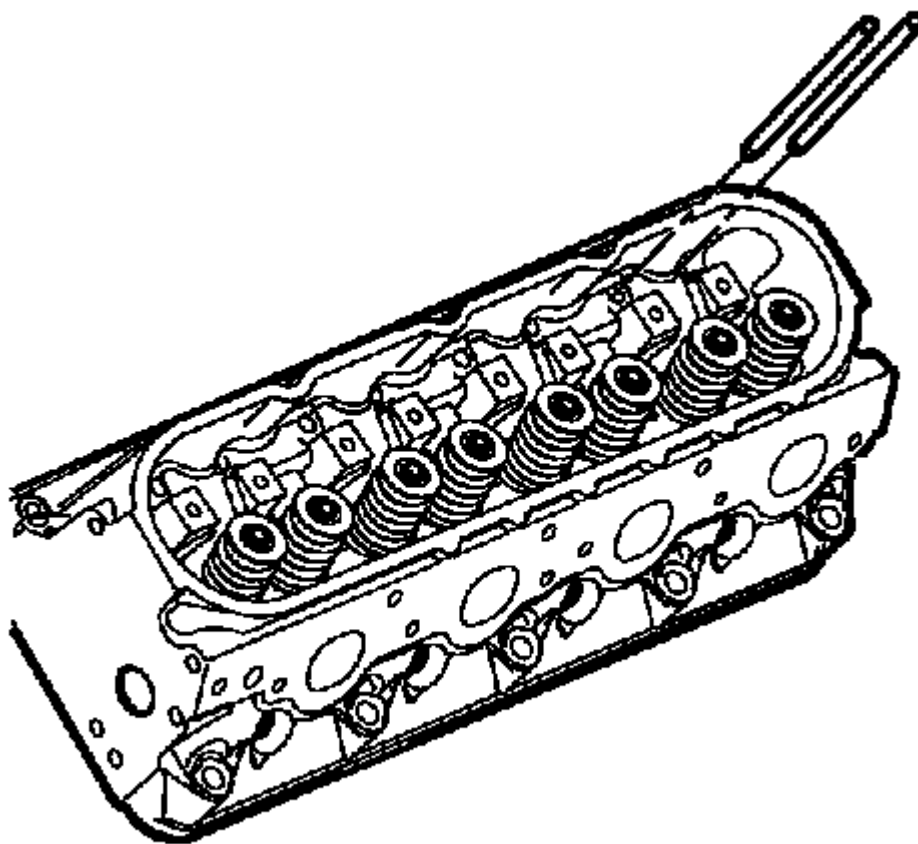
View Of Valve Rocker Arm Pivot Support
